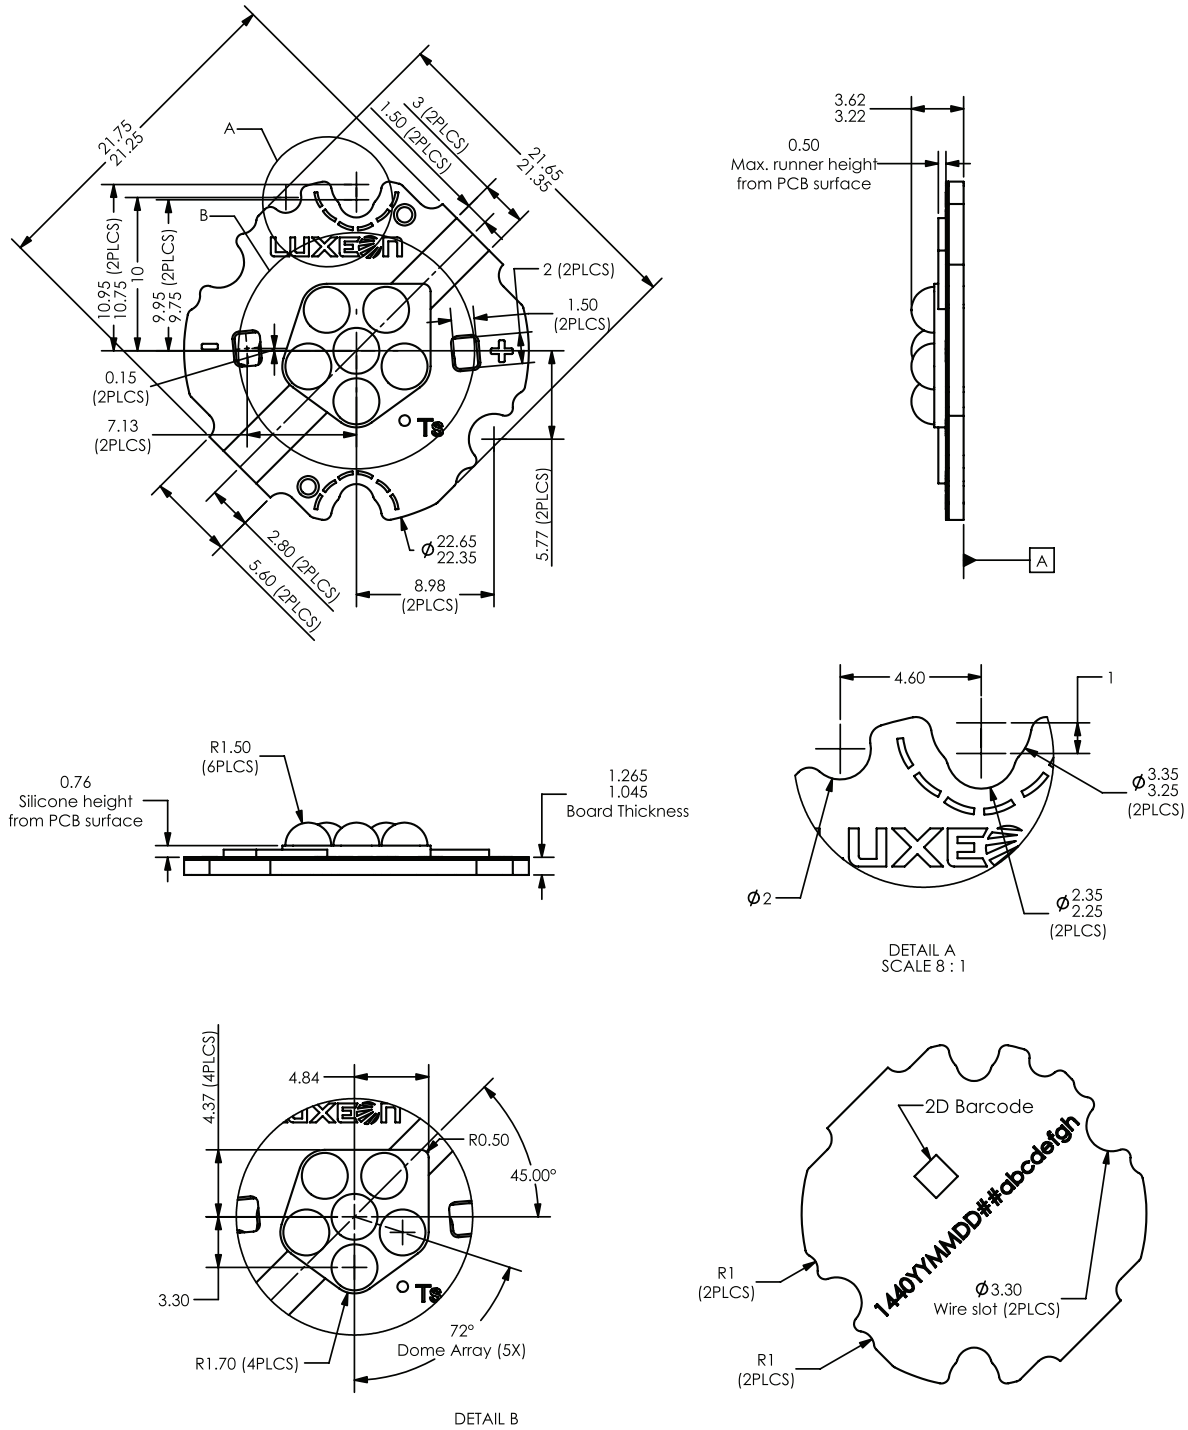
Dimensions for LXKx-Pxxx-xxx6.
